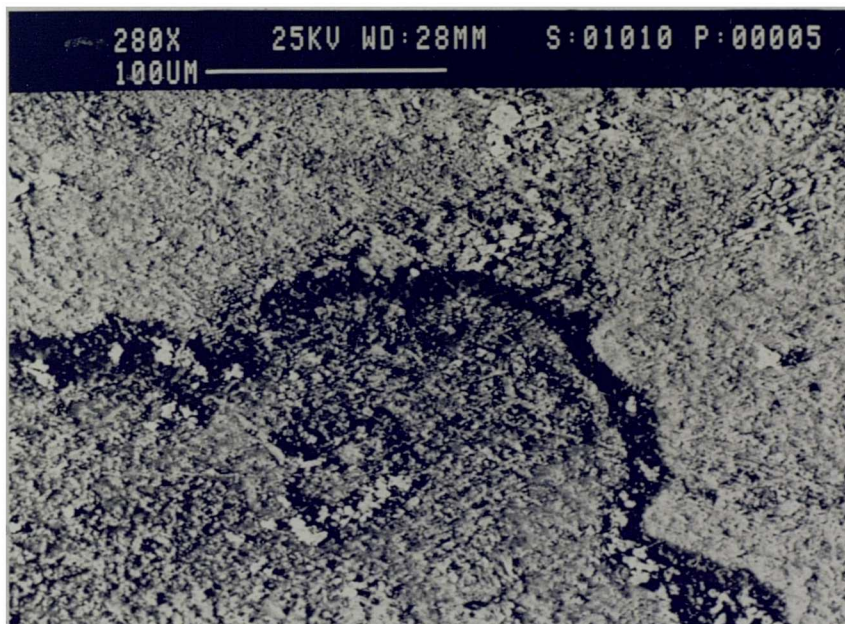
Formation of deposited layers on the rake face of PCD insert machining at the speed of 250 m/min.
